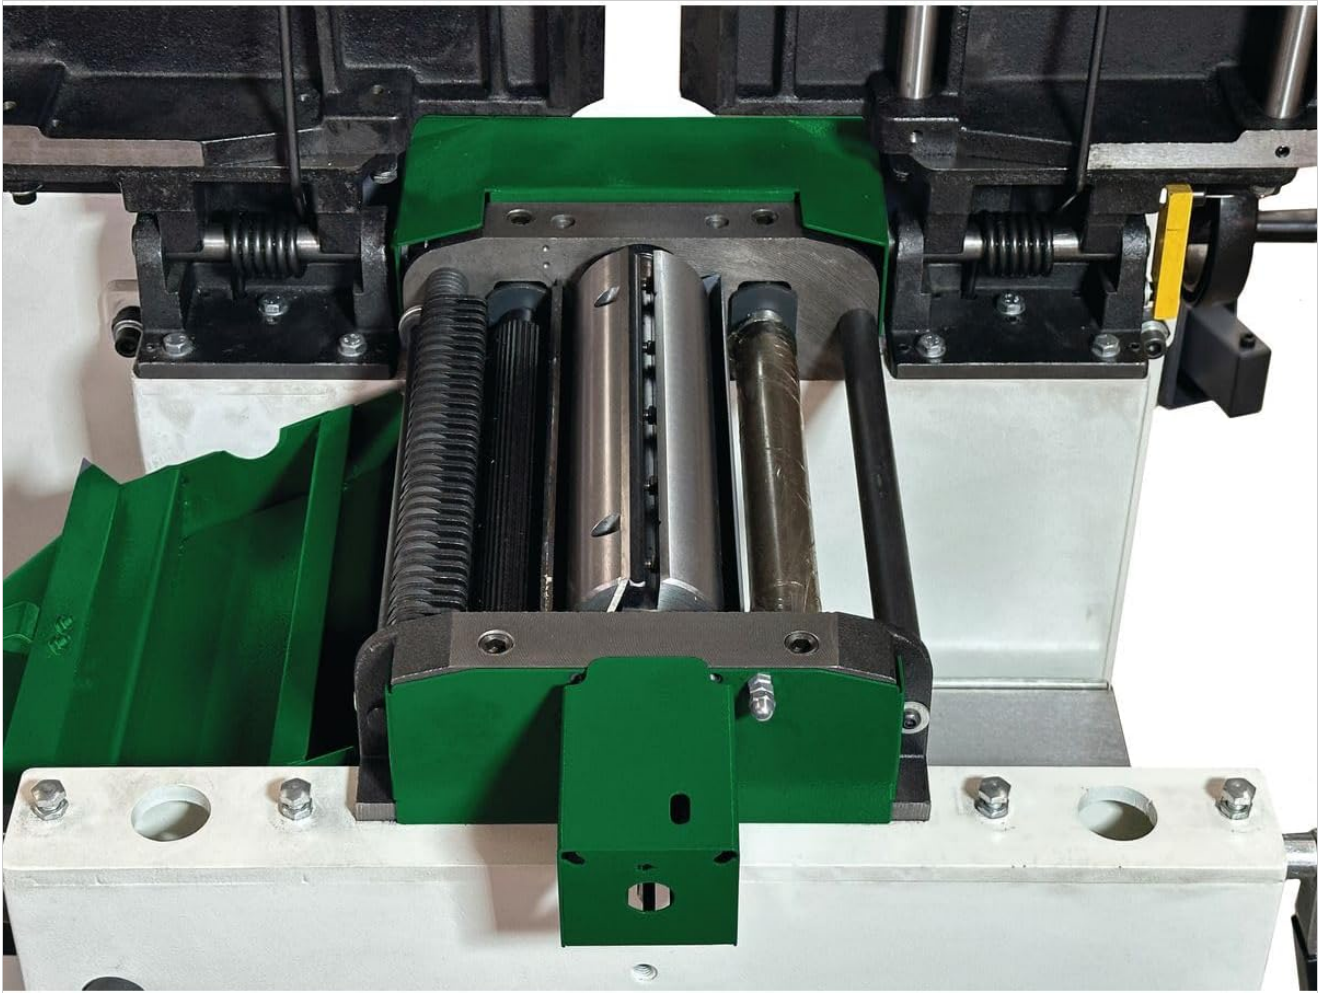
View of the planer cutter head and feed rollers, critical components for smooth planing and thickening.
